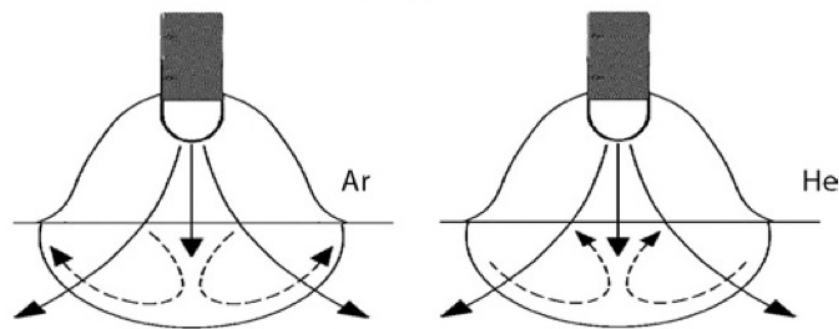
Schematic diagram of weld pool fluid flow when using alternating shielding gases [1.62]
